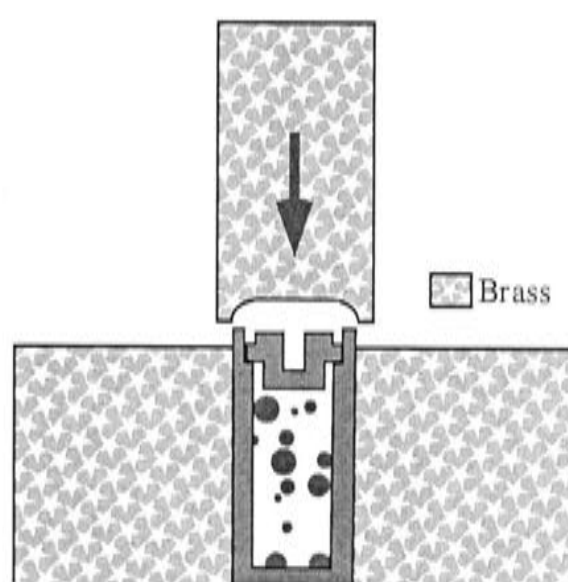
Schematic of swaging device for cold sealing capsules (cross sectional view, includes capsule not yet sealed).
